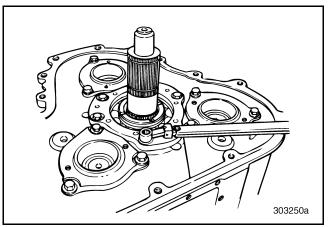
Installing Front Mainshaft Rear Bearing Cover (T313L/T318L Shown)
